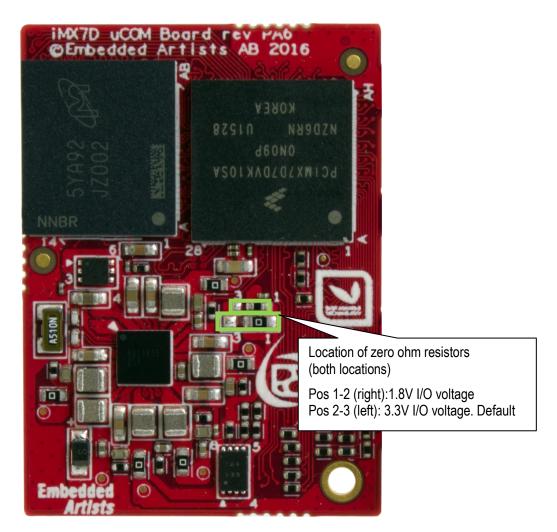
iMX 7Dual uCOM Board, Top Side Photo
